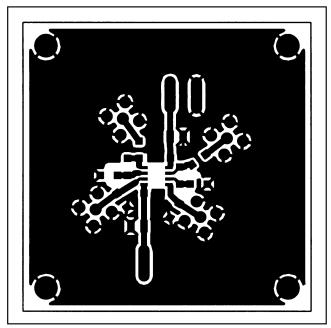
MAX4117 EV Kit PC Board Layout—Component Side
